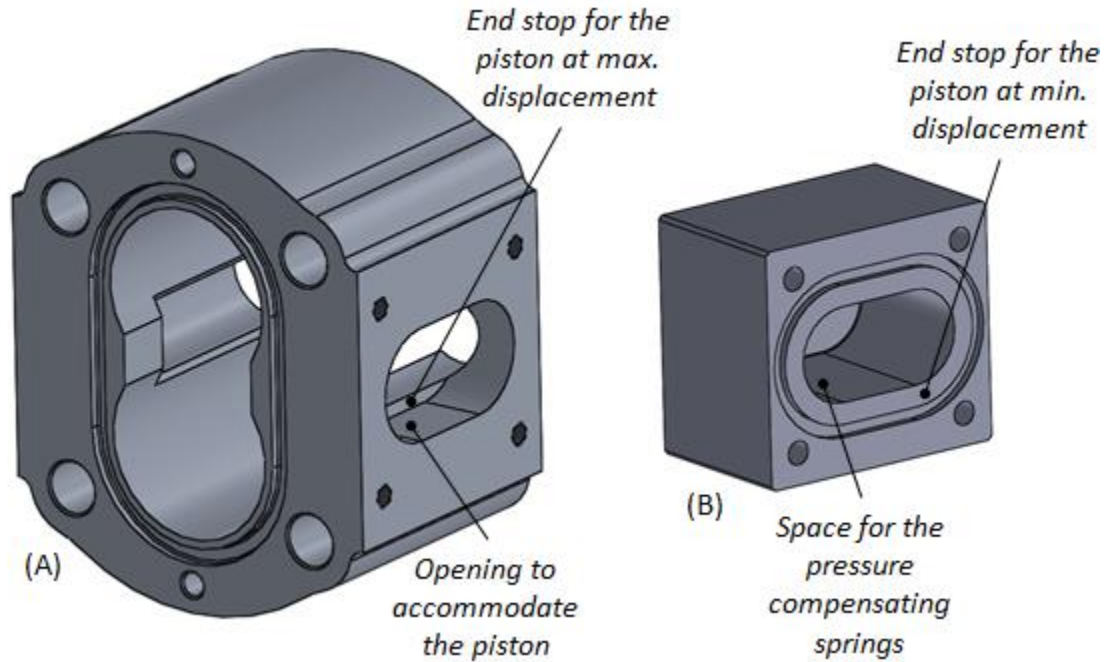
(A) Design of the casing, showing the opening to accommodate the piston and the end stop for max displacement; (B) View of the pressure compensator casing showing the space for the pressure compensating springs and the end stop for min displacement.
